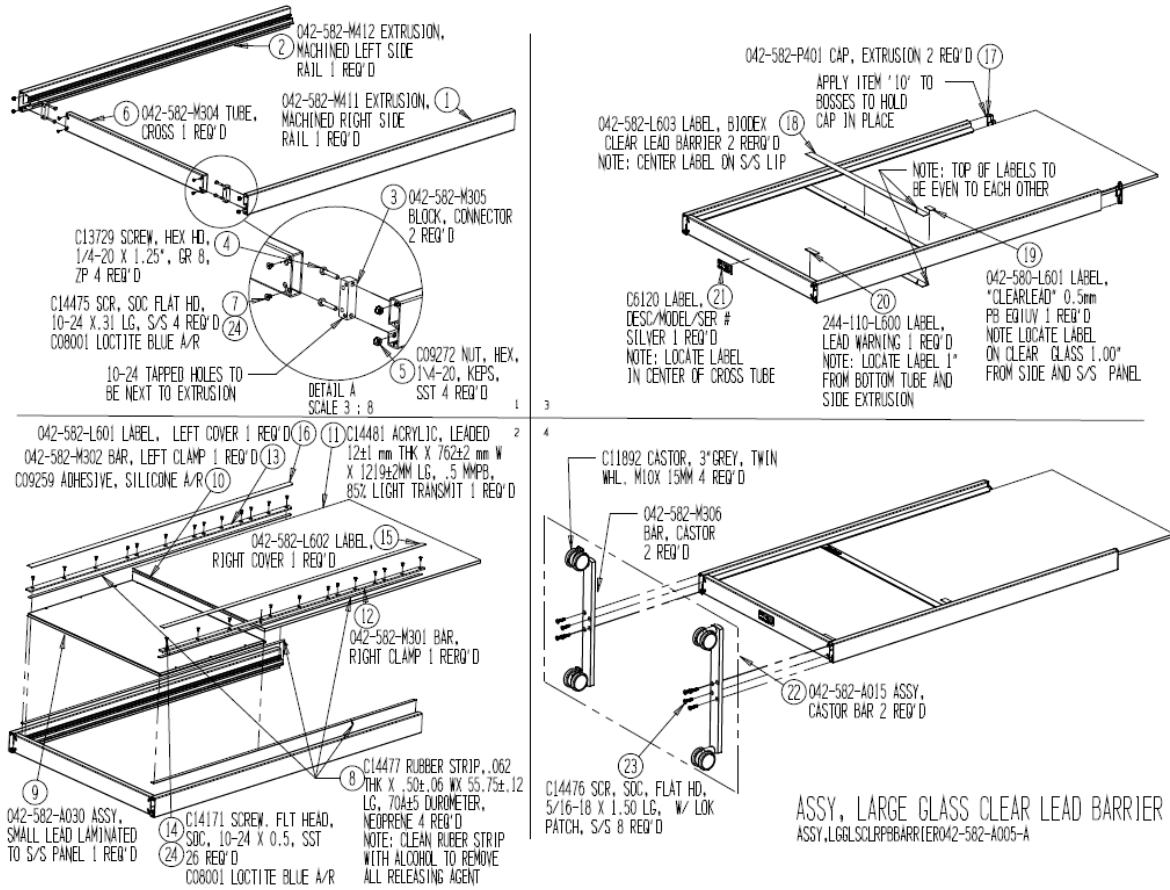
Large Clear-Lead Mobile Barrier Assembly Drawing
